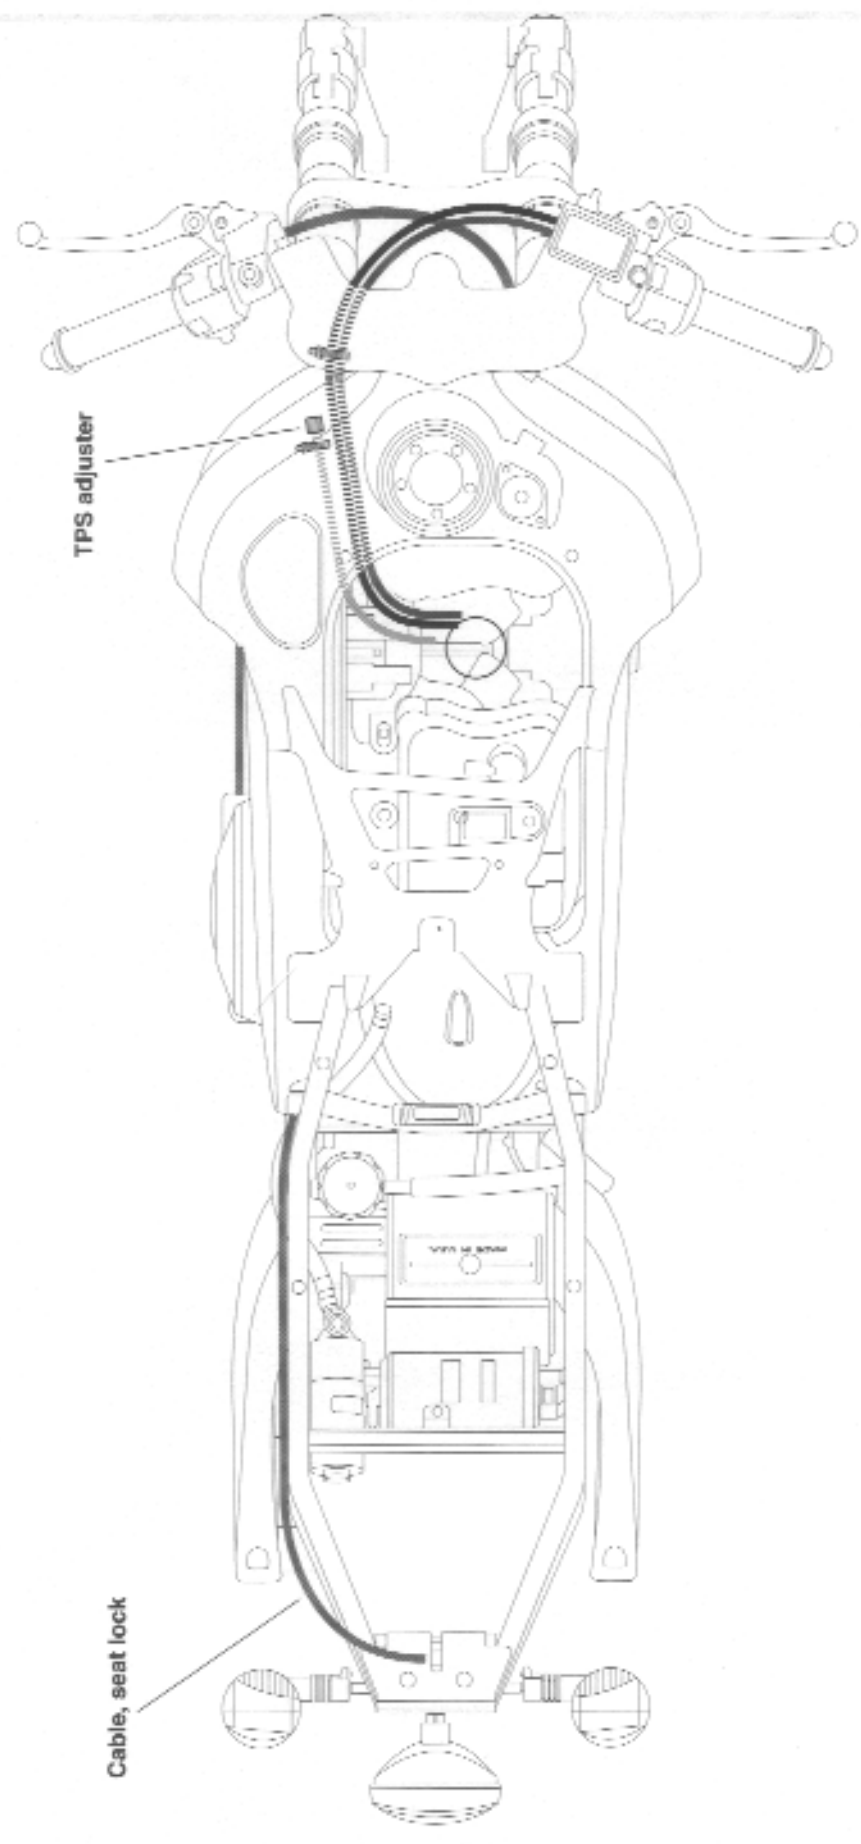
Clutch, Throttle and Seat Release Cables, Top View
